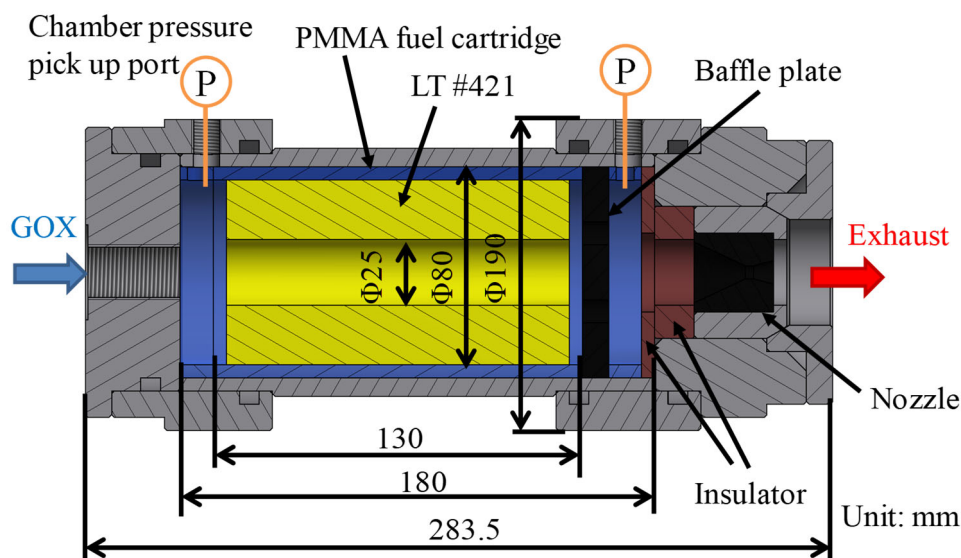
Cross-section view of a test motor with a baffle plate.
